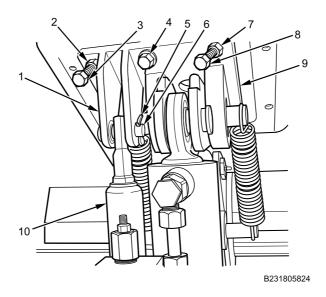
Lowering Upper Lock Bracket and Removing Gas Spring.
